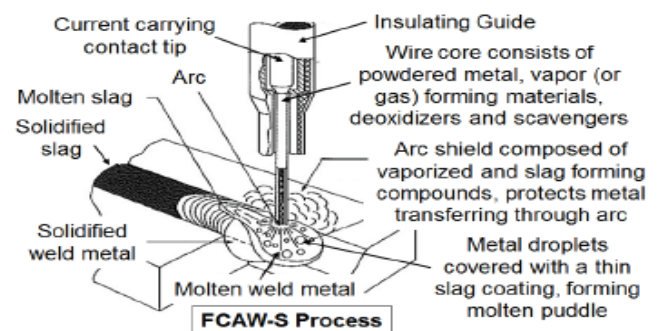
FCAW-S self-shielding wire welding procedure
